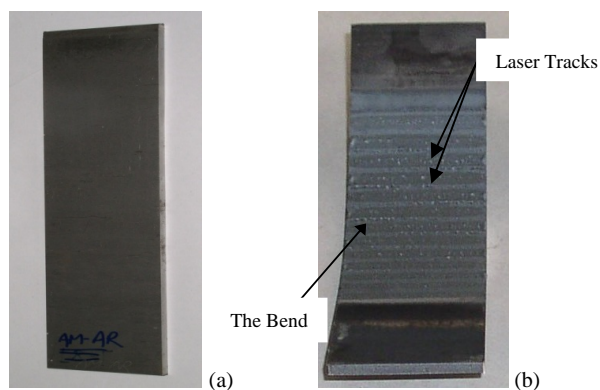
The flat untreated sheet (a) and the laser formed sample (b)
